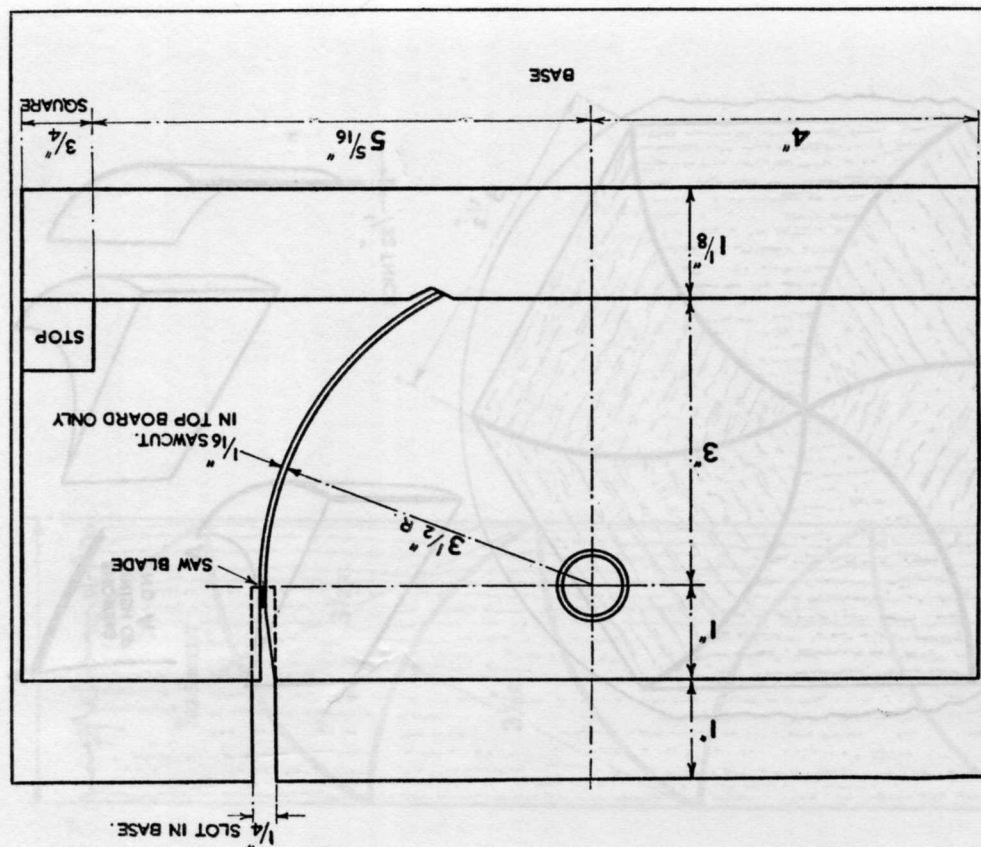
PLAN OF JIG FOR CUTTING CURVED SECTIONS
